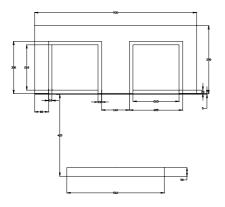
Cross-section and dimensions on Overband Magnetic Separator
